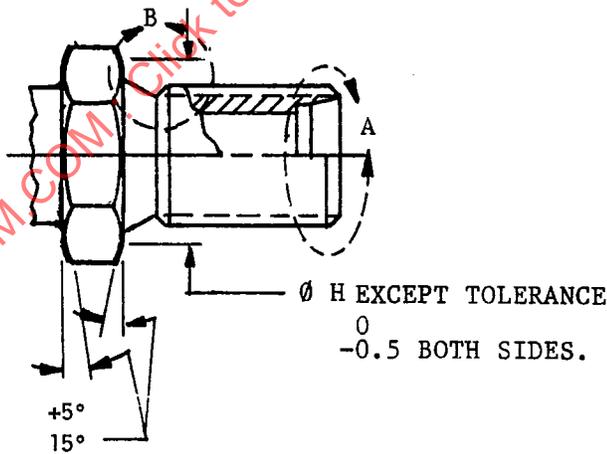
FRONT AND SIDE VIEWS FOR STYLE E
